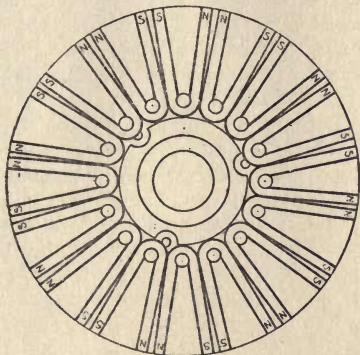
Diagram of the correct assembly of the magnets on the flywheel.
